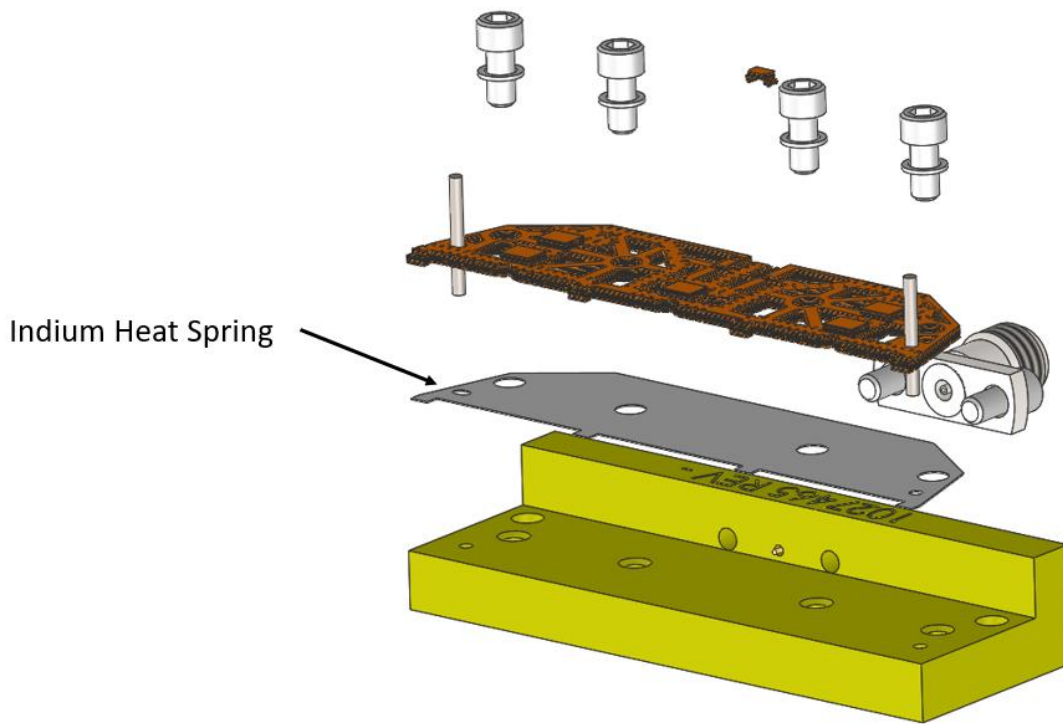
Mounting a PSX12Q12W combiner with Indium Heat Spring® interface
